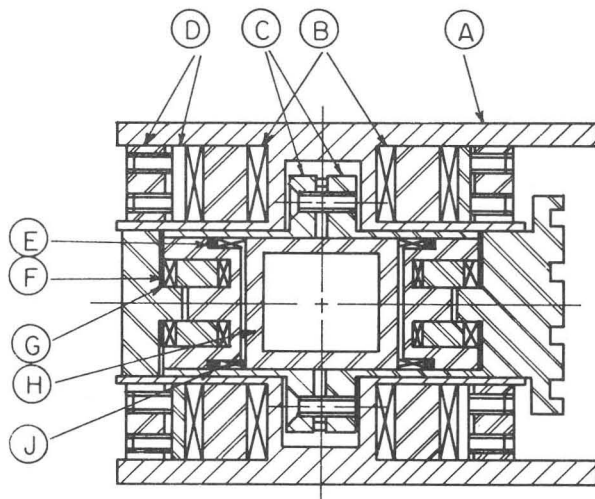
Channel 2 module cross section: A - gradient support frame; B - gradient racetrack coils; C - L-shaped brackets; D - precompression bars; E - copper rail; F - copper pressure plate; G - steering racetrack coil; H - box structure; J - pancake coil.
